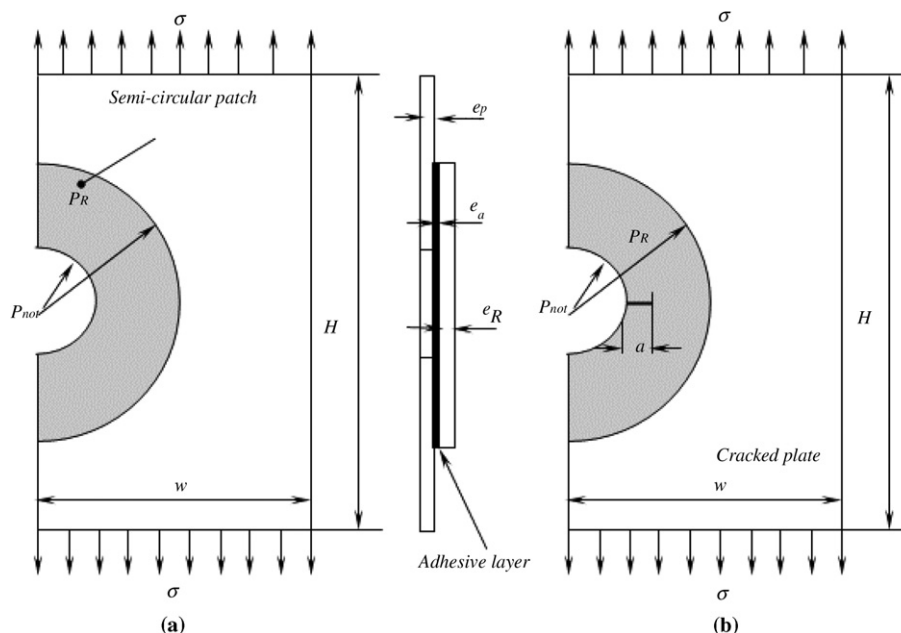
Specimen details—cracked plate, adhesive and patch. (a) Notch without crack, (b) notch with crack.
